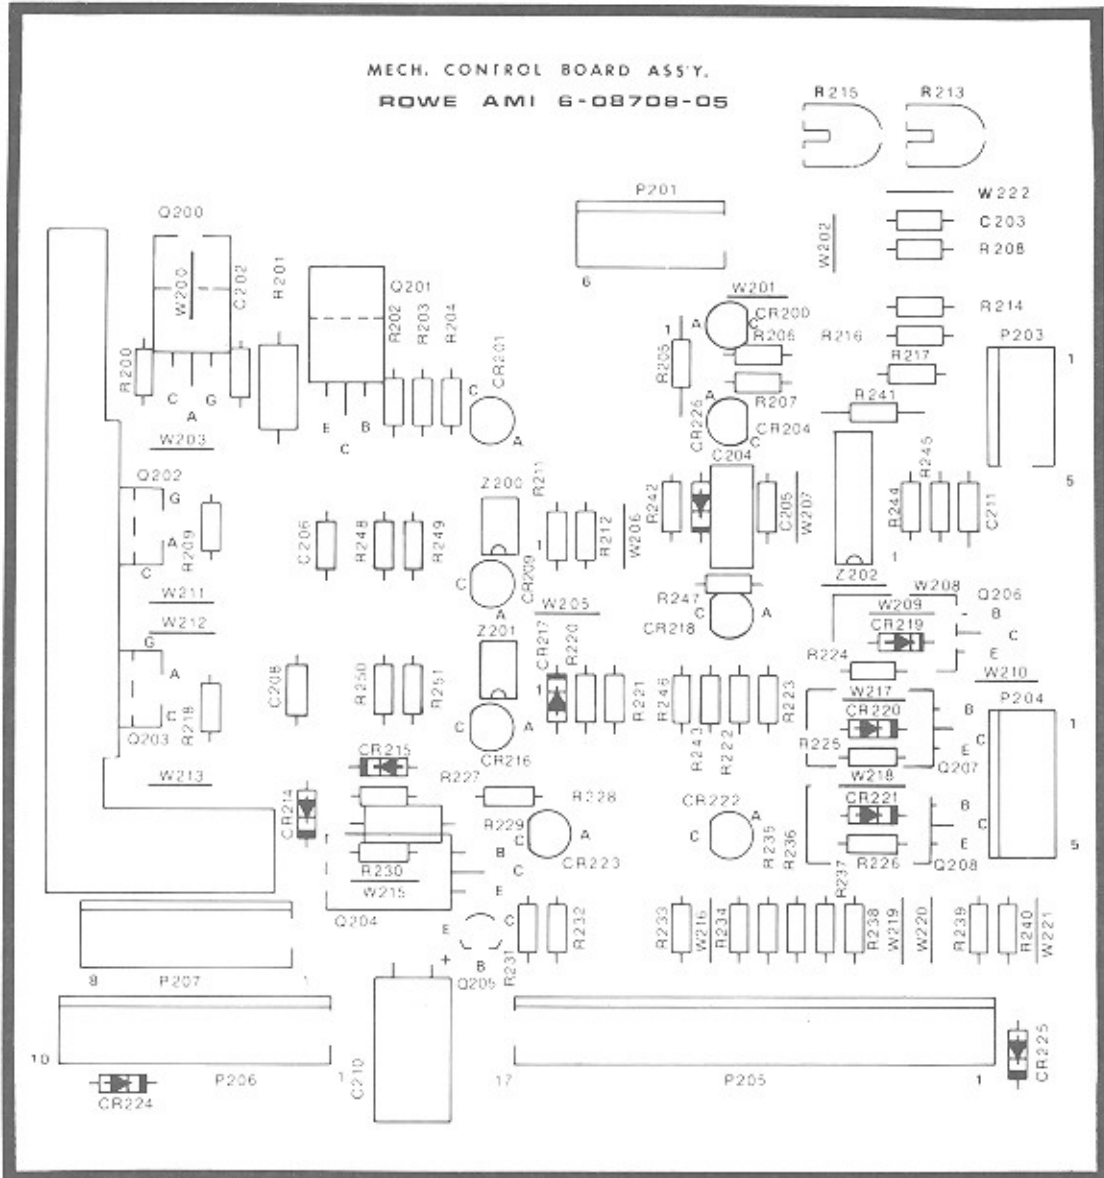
B. Mechanism Control Assembly Circuit Board Layout
